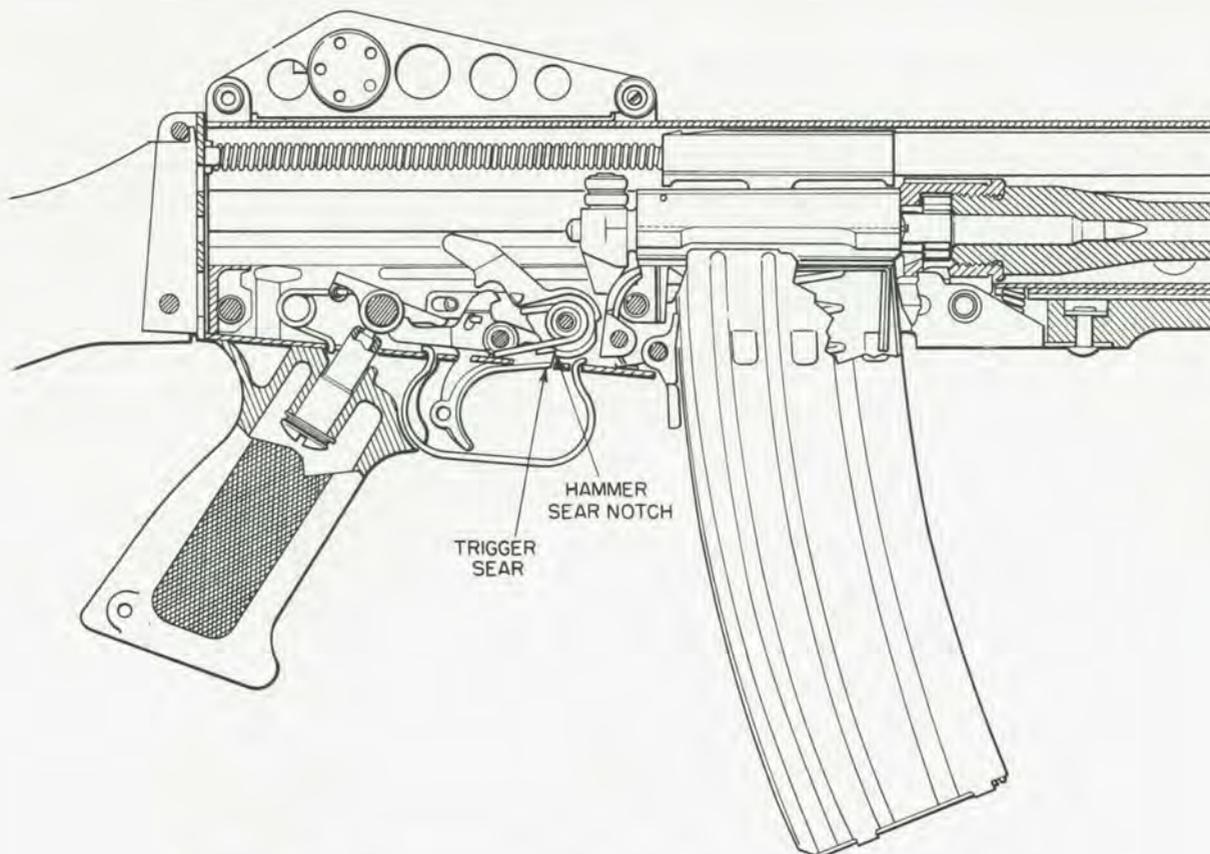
Carrier and bolt forward, round chambered, hammer sear notch engaged on trigger sear.
